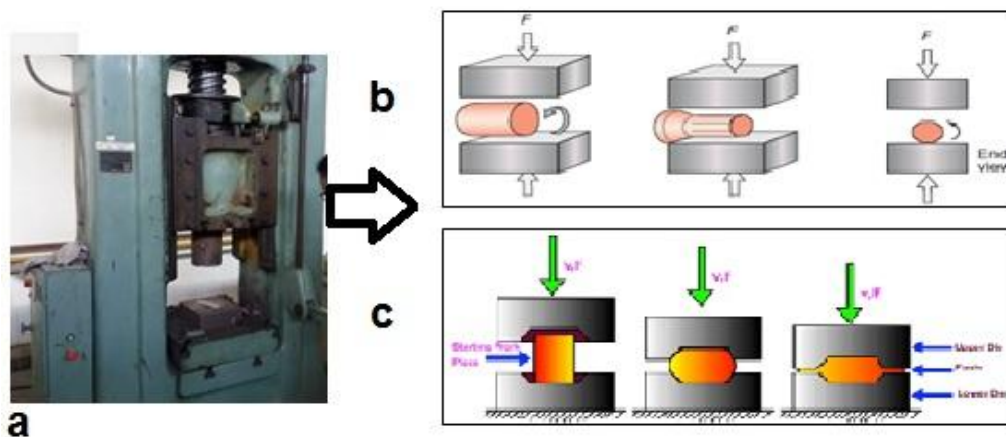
a) Multi-axial forging machine, b) Scheme of open die drop Multi axial forging process, c) Scheme of close die drop multi-axial forging process.
